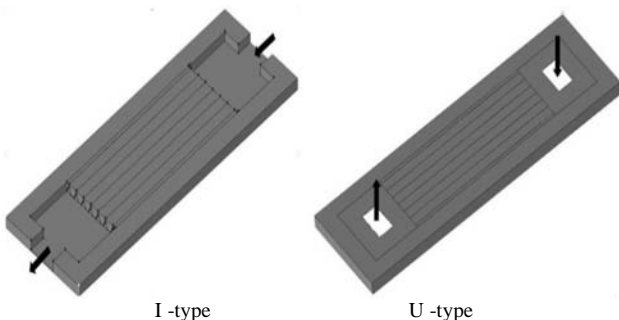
The geometry showing the I and U-type inlet and outlet arrangements
